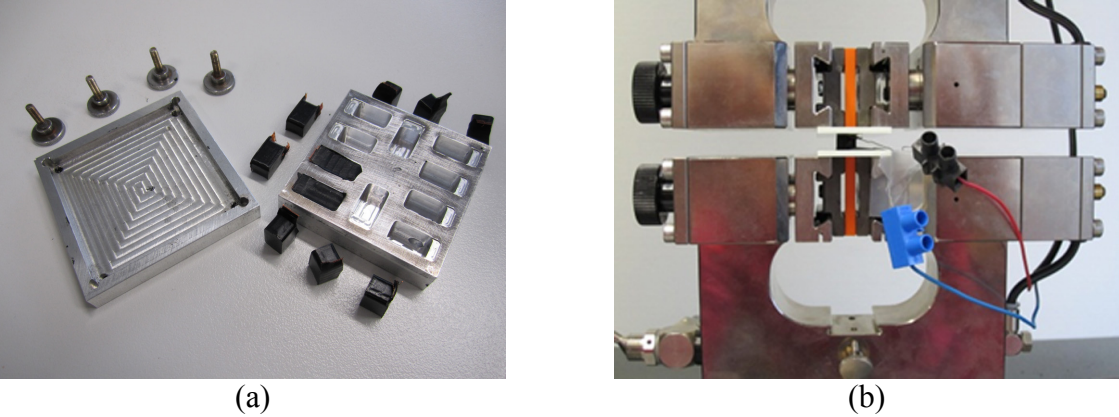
a) Sensor specimens with the press tool; b) Test setup
